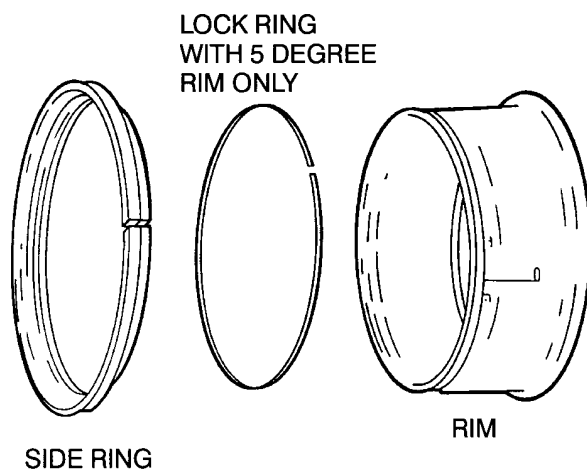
Rim for Cast Spoke Wheel with Tube Type Tire
